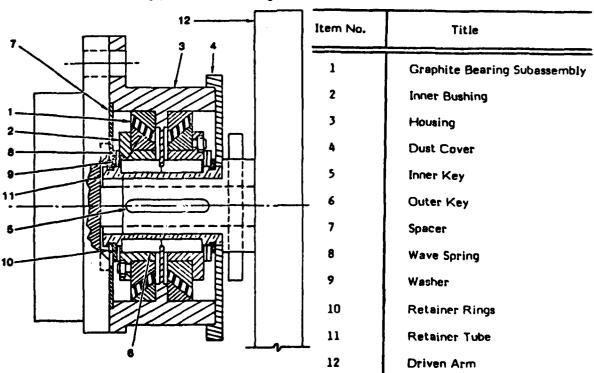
GOODYEAR AXLE COUPLER (ROTATING CONDUCTOR) ASSY
